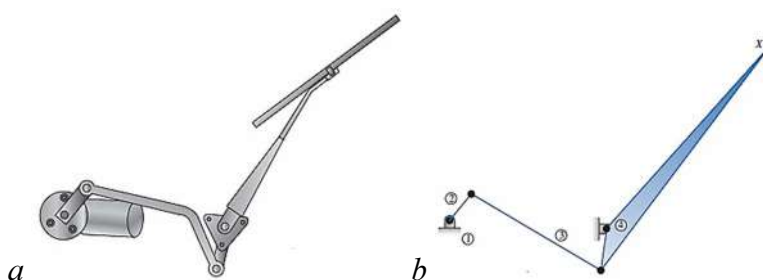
Mechanical system: a – rear-window wiper mechanism; b – kinematic scheme [1]
